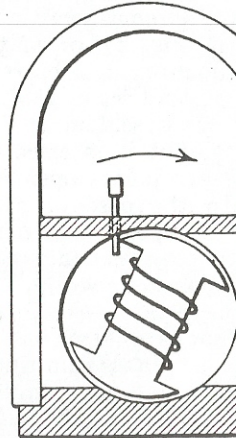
SOME MONOBLOC MACHINES ARE PROVIDED WITH A SMALL HOLE IN THE TOP OF THE CASTING OVER THE ARMATURE TUNNEL. A small drill or jig-pin passed through the hole so that it will just fit between the edge of the pole shoe and the trailing edge of the armature when the breaker points are just opening.
